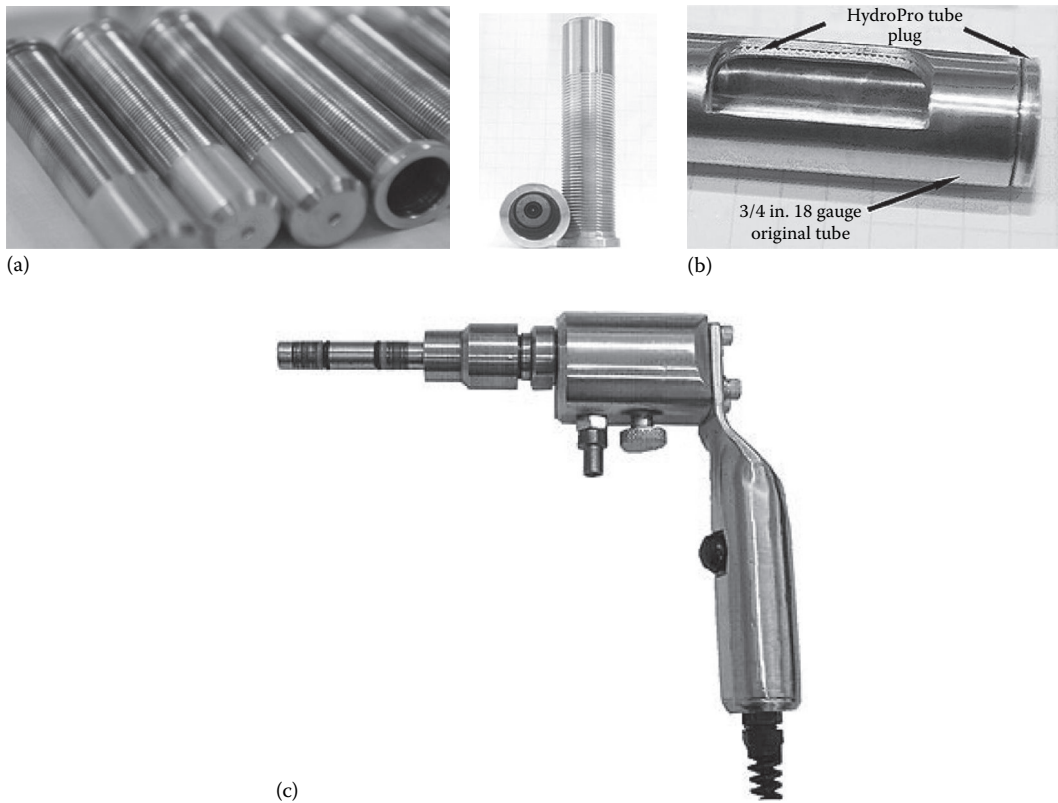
Tube plugs. (a) Unexpanded tube plugs, (b) cutaway showing a HydroPro tube plug in place in a 3/4 in. 18 gauge original tube, and (c) HydroPro Tube Plug Installation Mandrel Assembly and Mandrel Holder (Gun). (Courtesy of HydroPro, Inc., San Jose, CA.)
